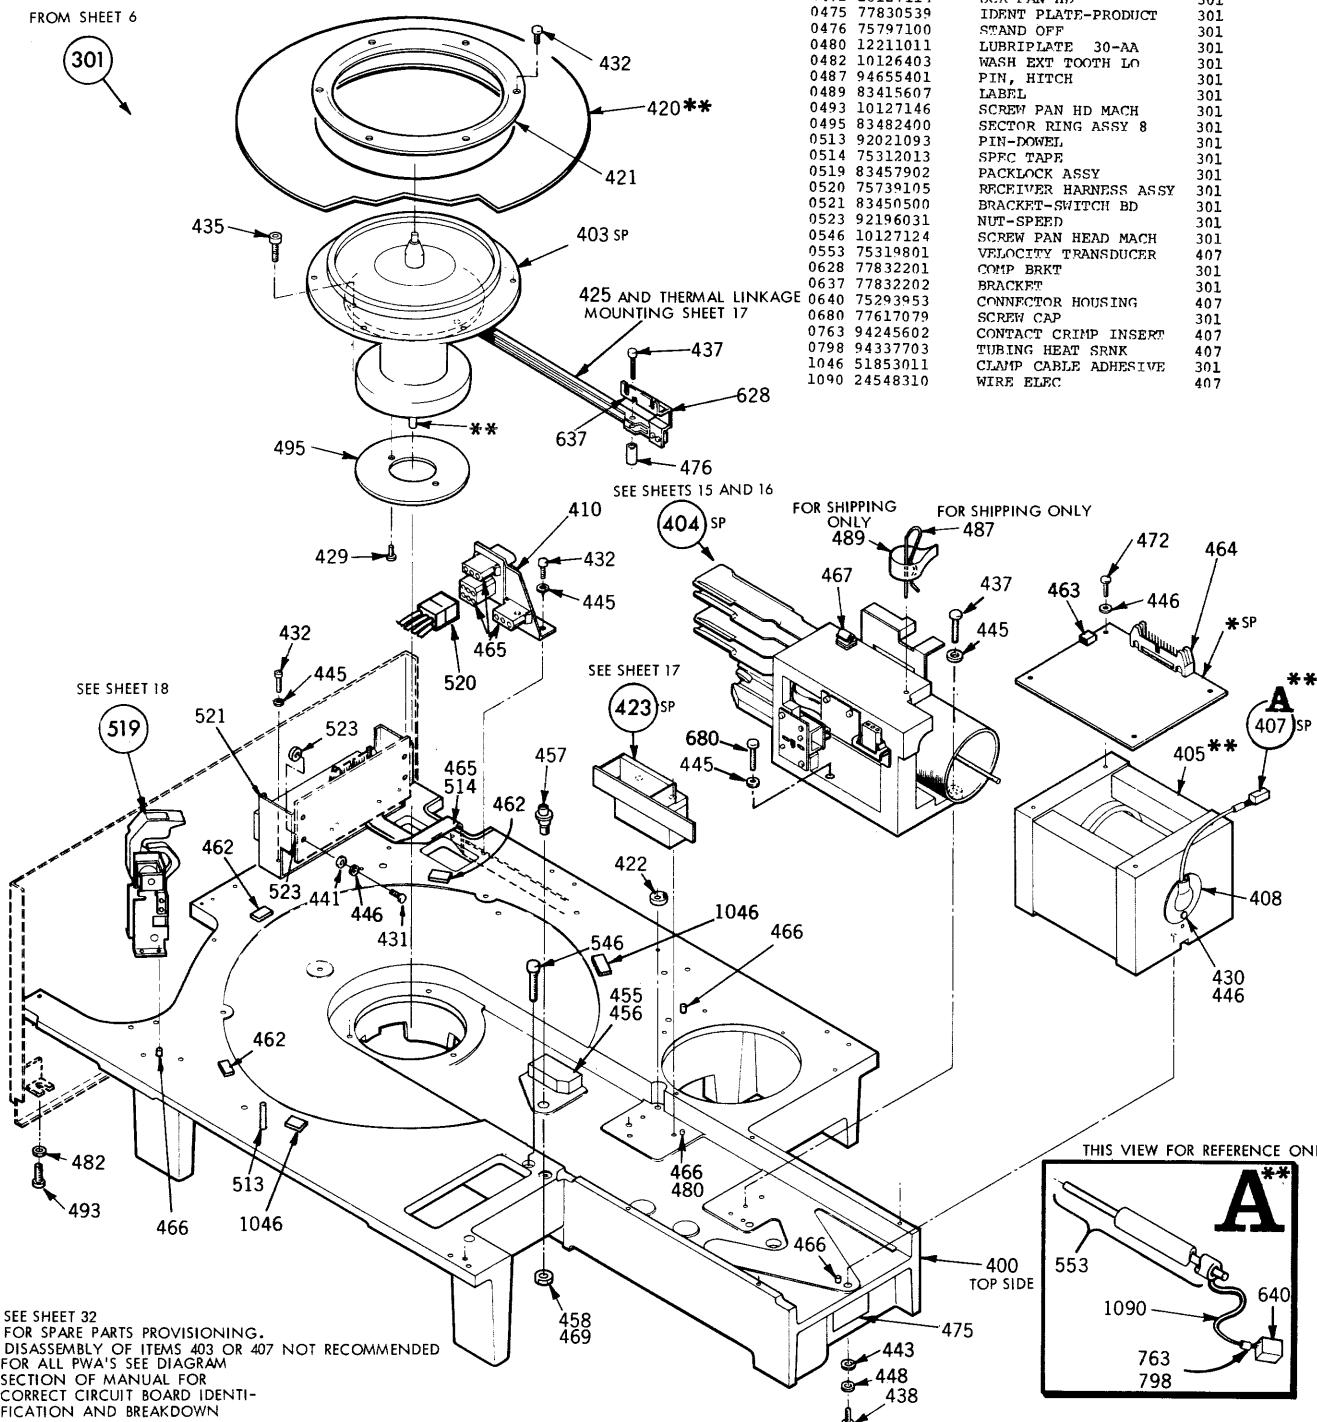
COMMON PARTS (SHEET 2 OF 3)
